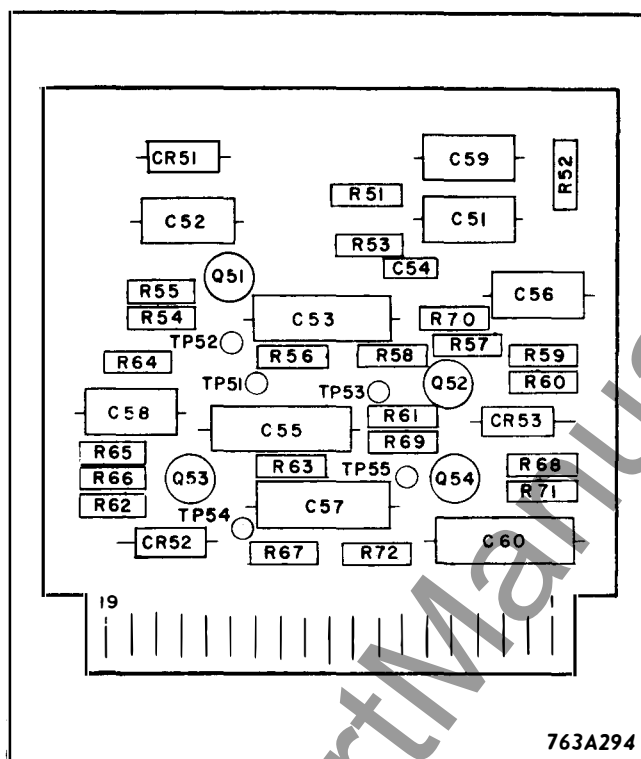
Component locations on amplifier and limiter printed circuit board.
